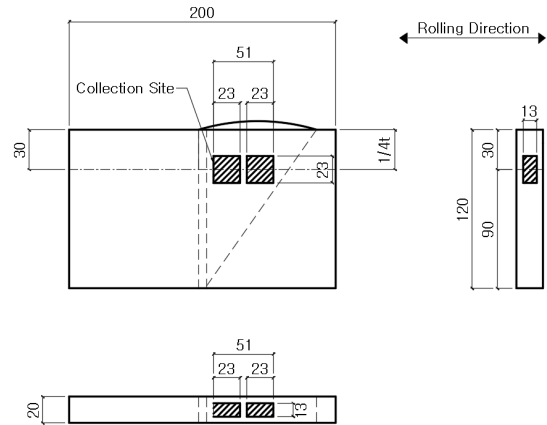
Weld Metal chemical composition and microscopic piece
